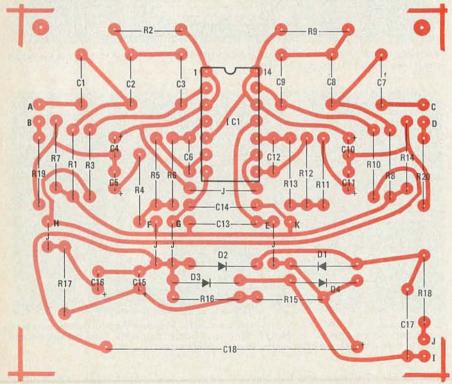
ALL PARTS except the wall-plug transformer, switches, and jacks are mounted on the PC board as shown.
